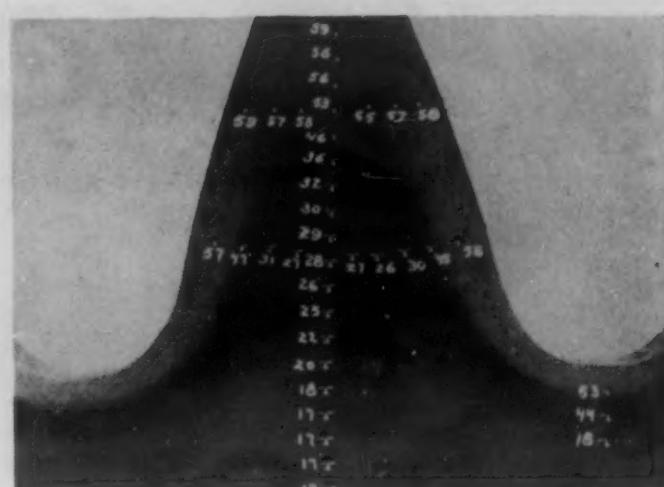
Hardness contour produced on 26-in. diameter, 5-in. face drive gear by induction heating at Caterpillar Tractor Co.
